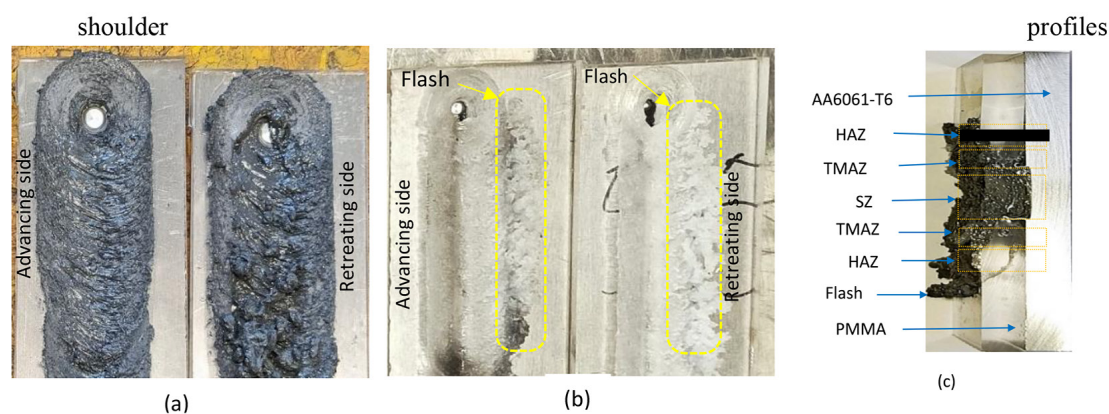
Surface material flow appearance of welded joints produced using different shoulder profile: (a) using flat shoulder (W4 and W5), (b) using concave shoulder (W11 and W12), (c) cross-sectional view indicating joint zones
